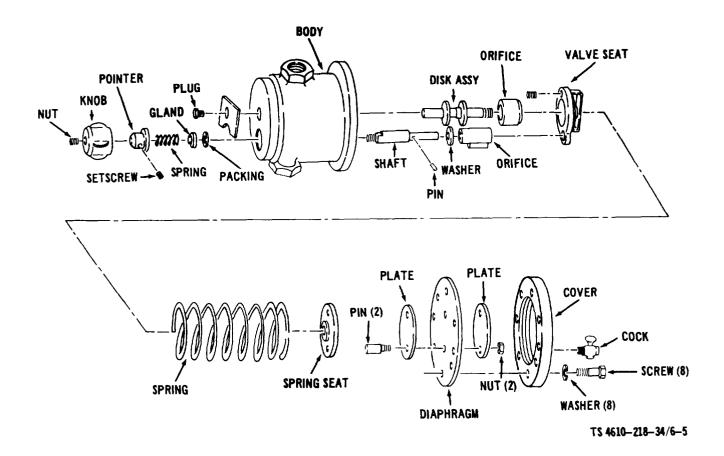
Adjustable Flow Controller, Disassembly and Reassembly
